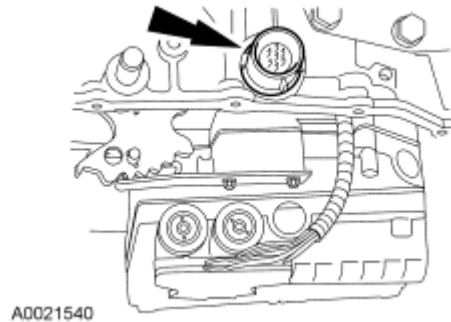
Locating Solenoid Valve Body Electrical Connector Retaining Tabs
